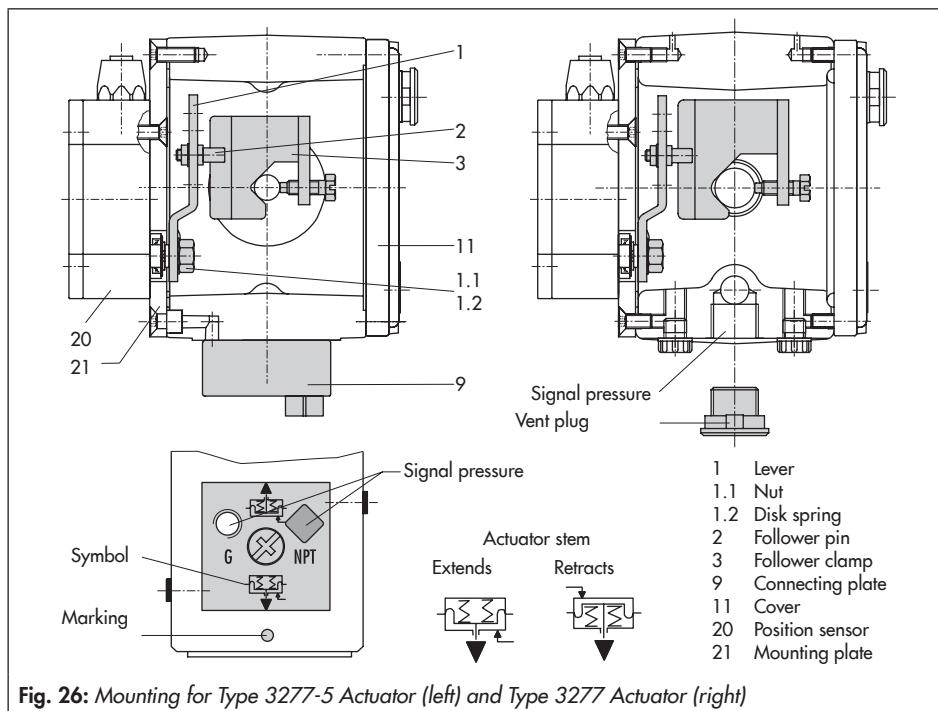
Mounting for Type 3277-5 Actuator (left) and Type 3277 Actuator (right)
